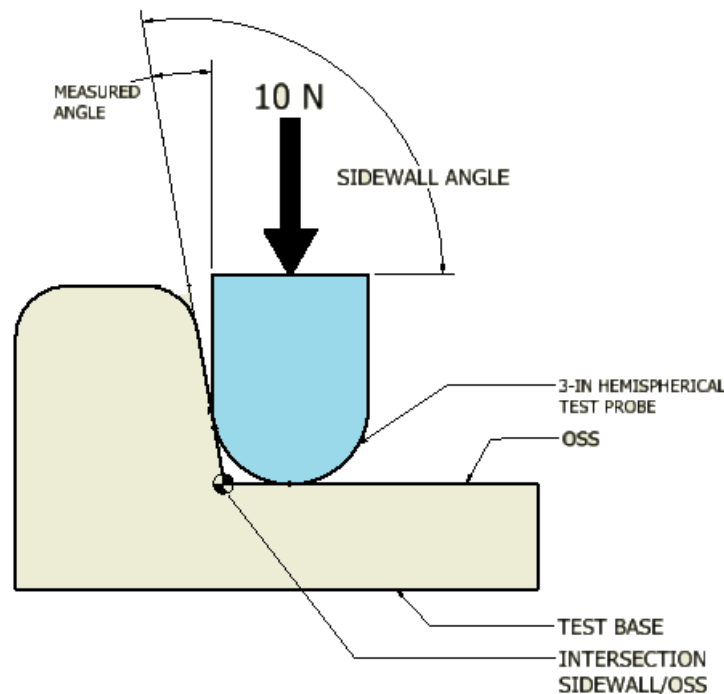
Test Fixture Configuration for Sidewall Angle Measurement
